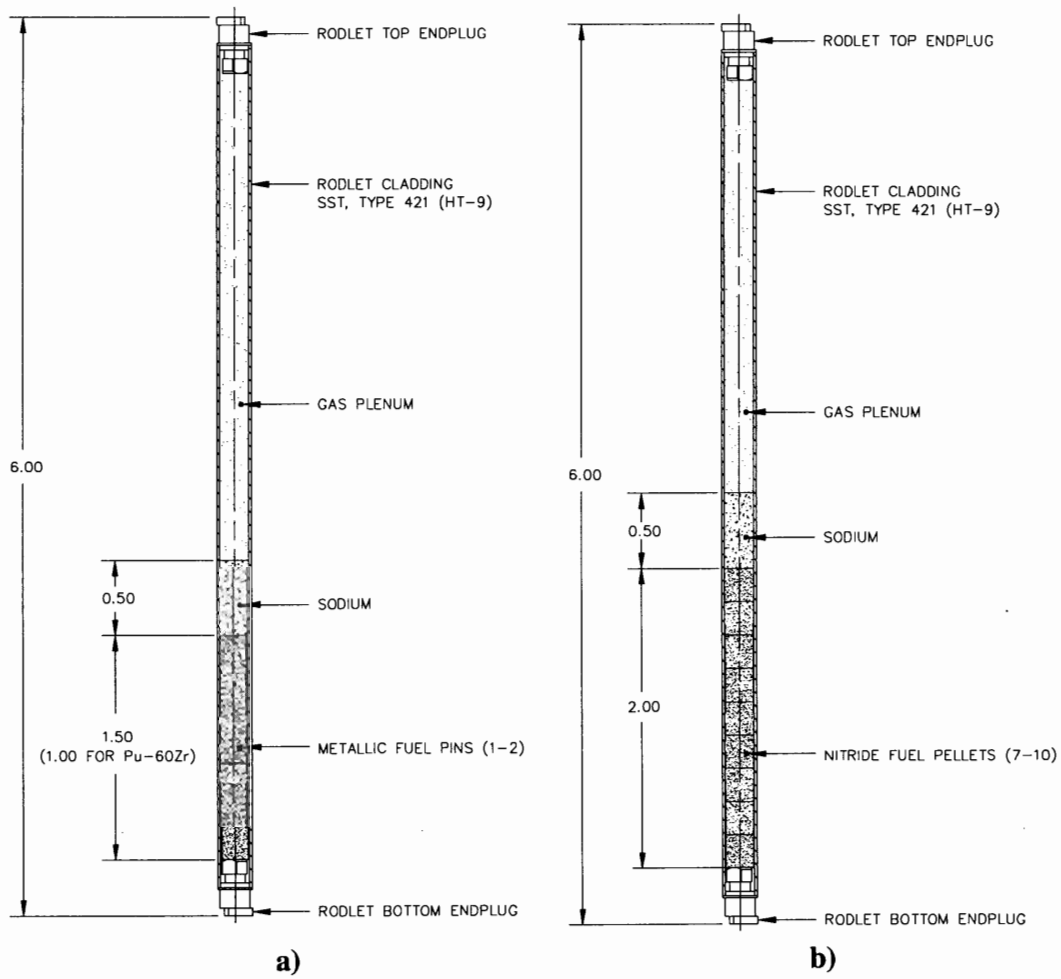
Rodlet assembly axial dimensions (inches) for a) metallic fuel and b) nitride fuel
